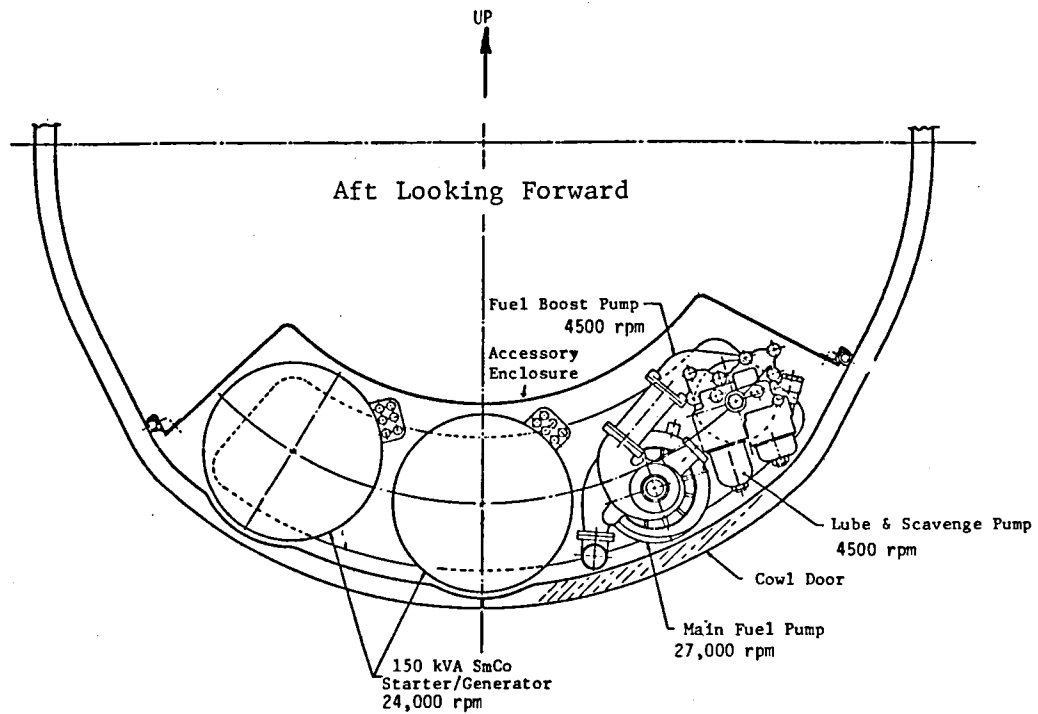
Packaging of Generator/Starters and Engine Accessories.
